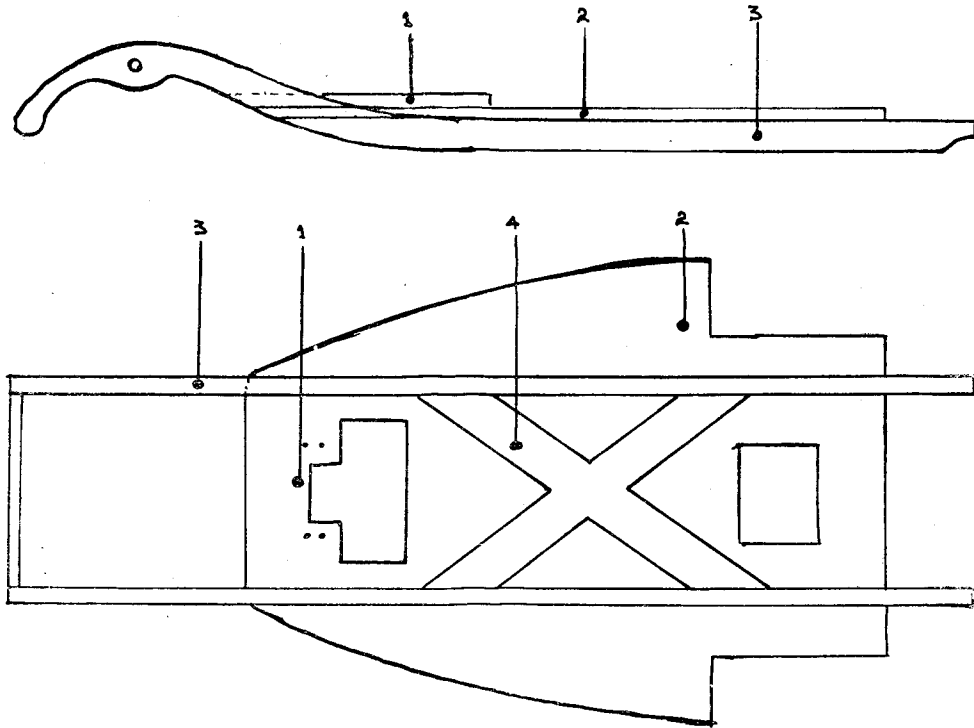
Chassis, engine mount and body platform. 1, Engine platform; 2, Body floor; 3, Chassis; 4, X cross brace.
